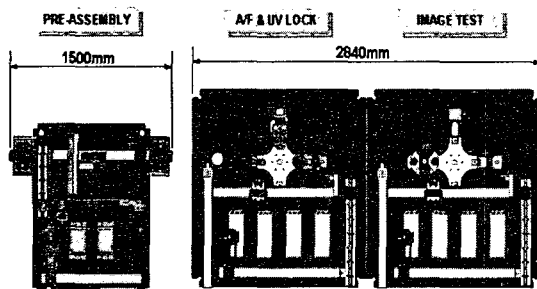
System layout & footprint for assembly and evaluation of camera module
